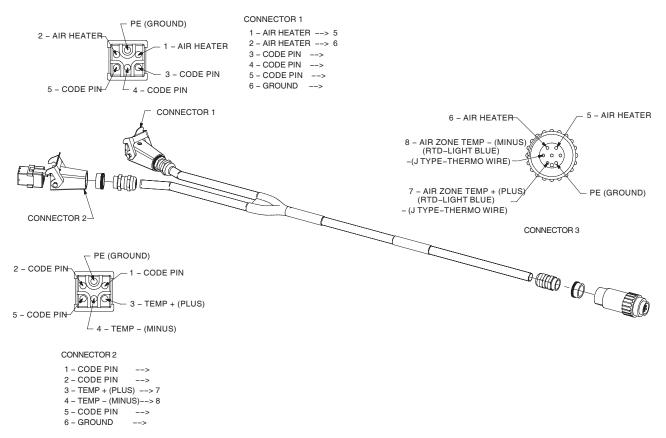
M-style splitter cable cordset pin positions (applicator air cordset to air extension cables)
